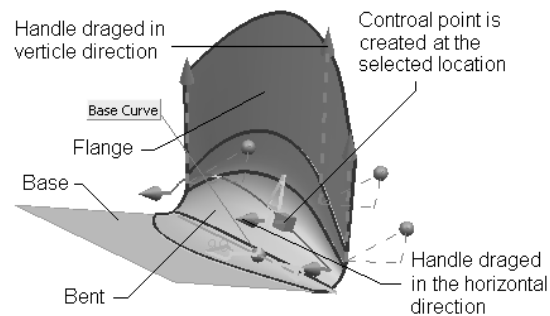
Part modified using the Flange Parameters and Continuity rollout
